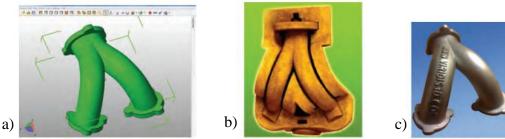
Technological route: part's file on the computer monitor (a); printed sand mold (b); finished casting (c)
